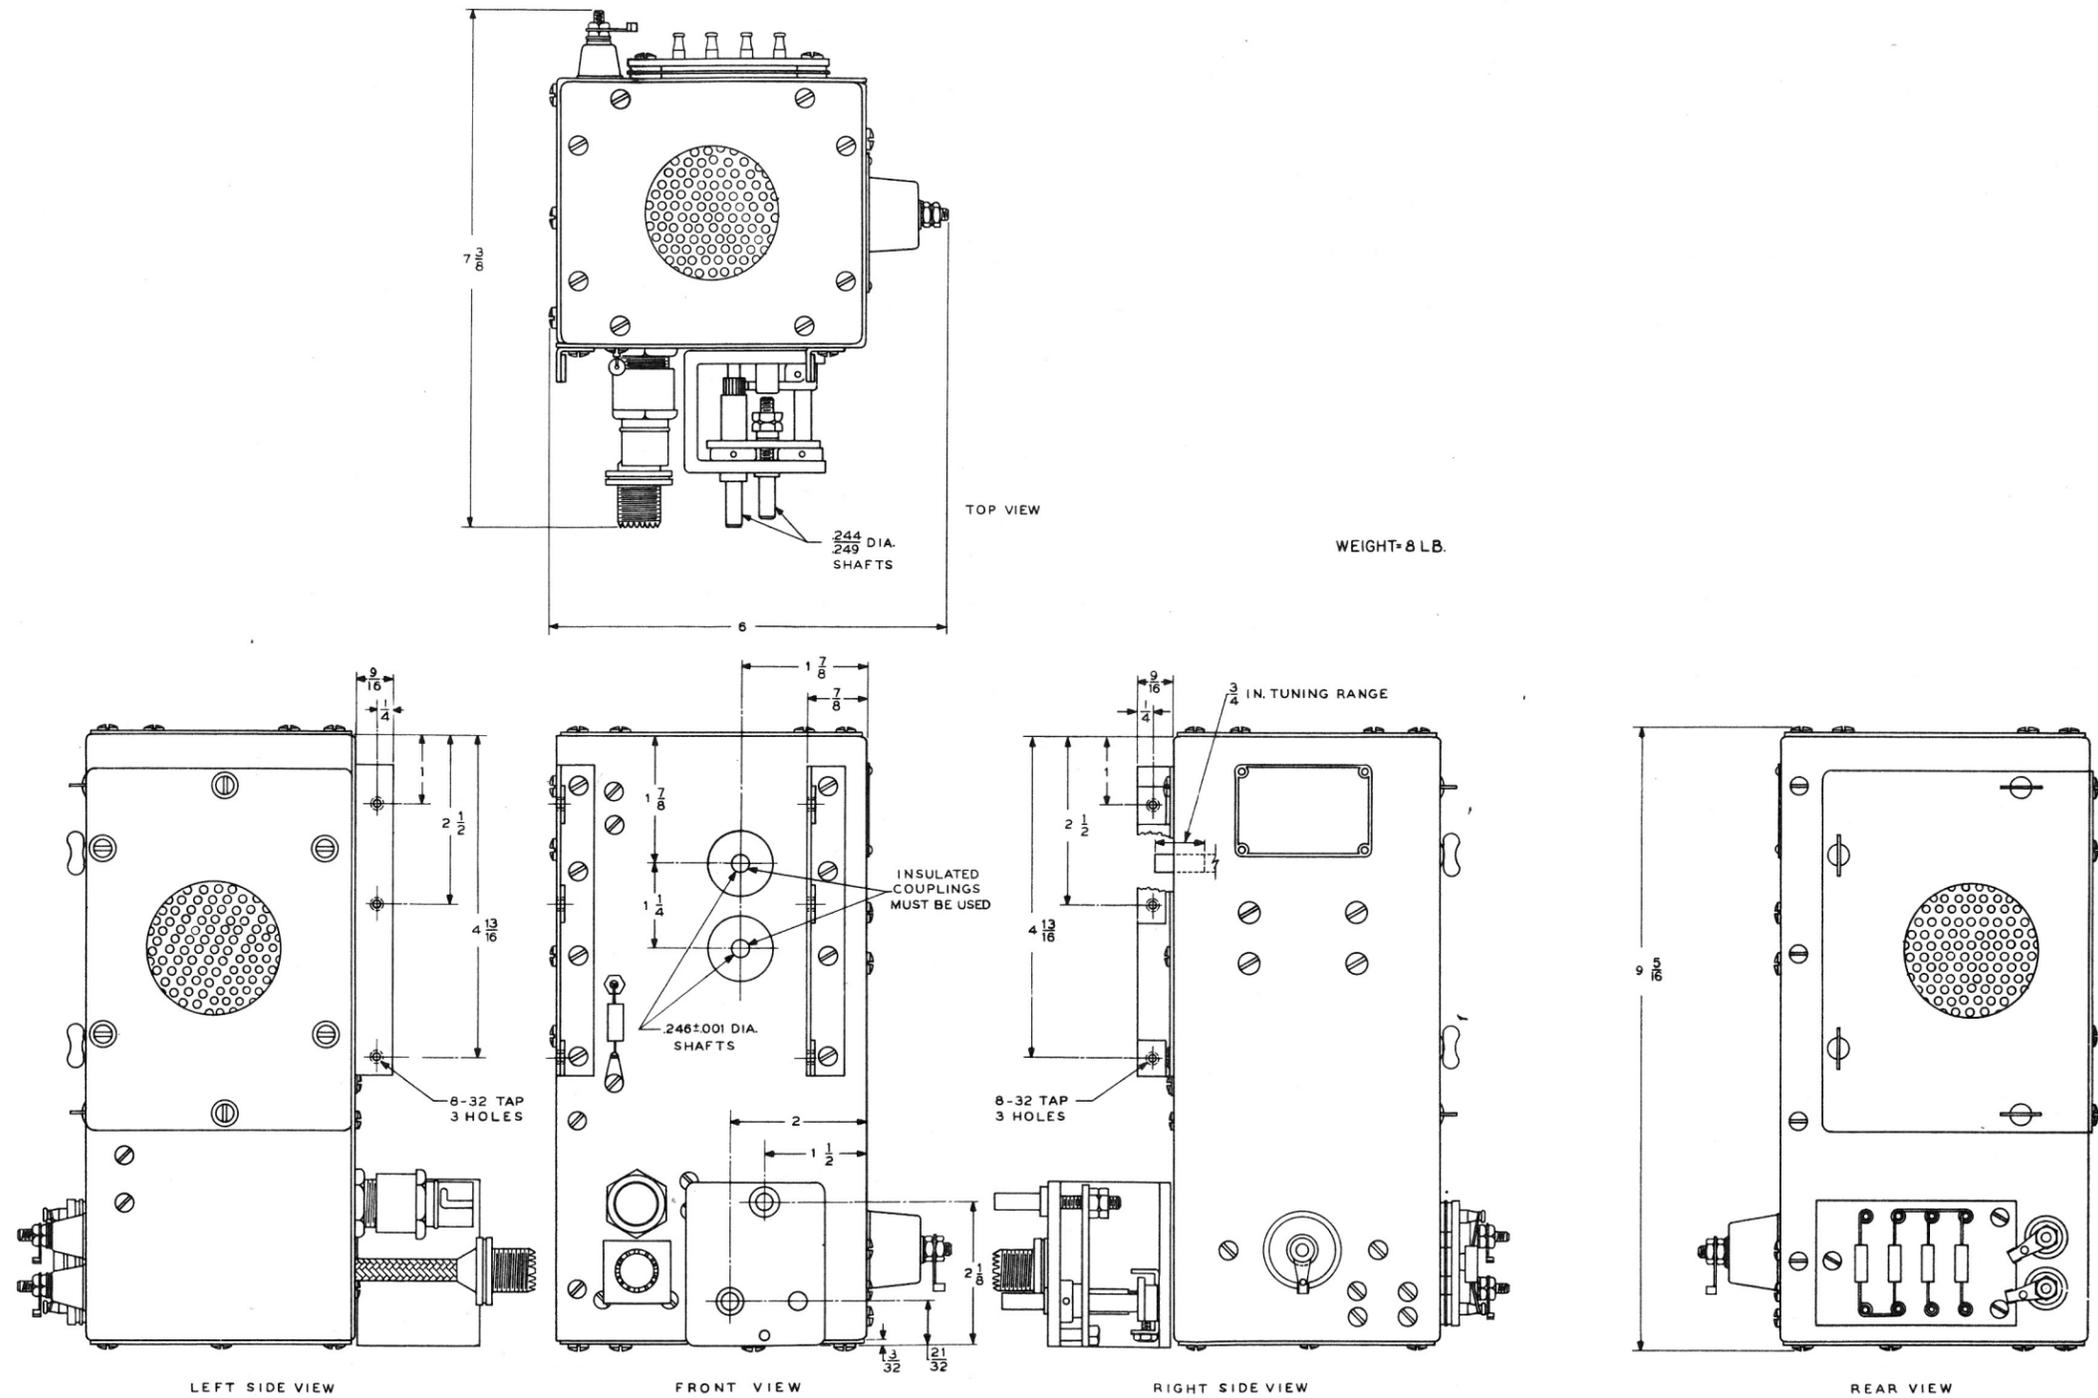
Transmitter R-F Oscillator Navy Type CFN-52ACQ Dimensional Outline Drawing
